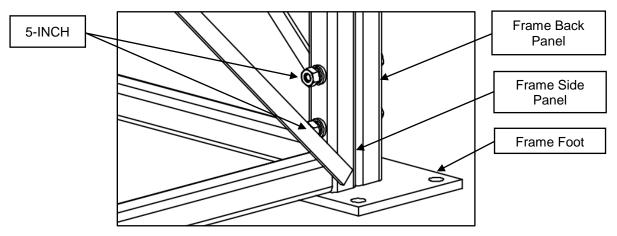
Connecting Frame Side Panels to Frame Back Panel
